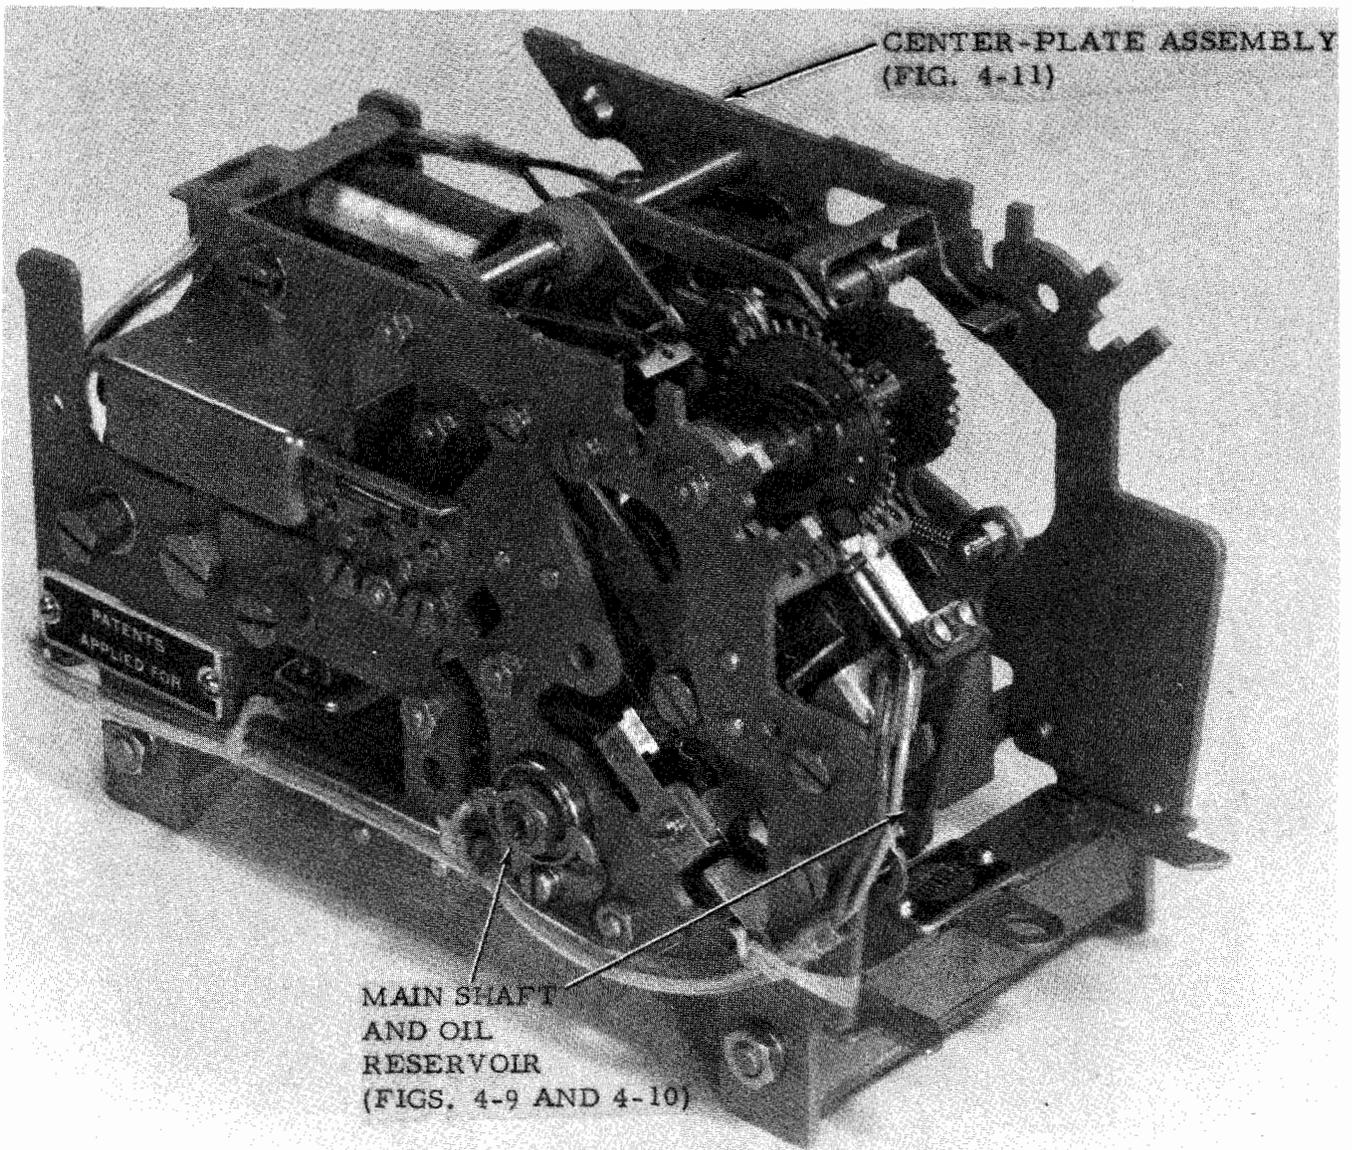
Main Shaft, Oil Reservoir, and Center Plate Assembly
